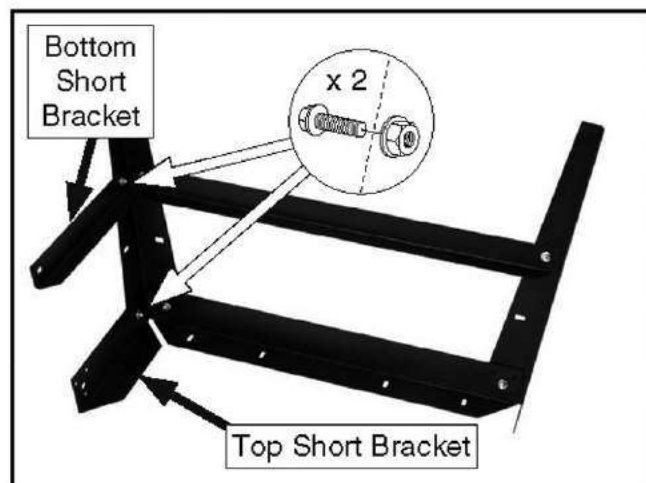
Top and bottom short brackets secured to stand leg assembly.
